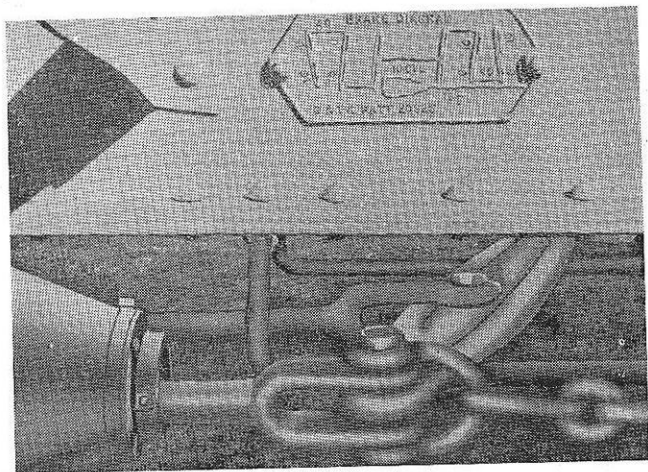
The brake diagram badge plate shows lever dimensions.
